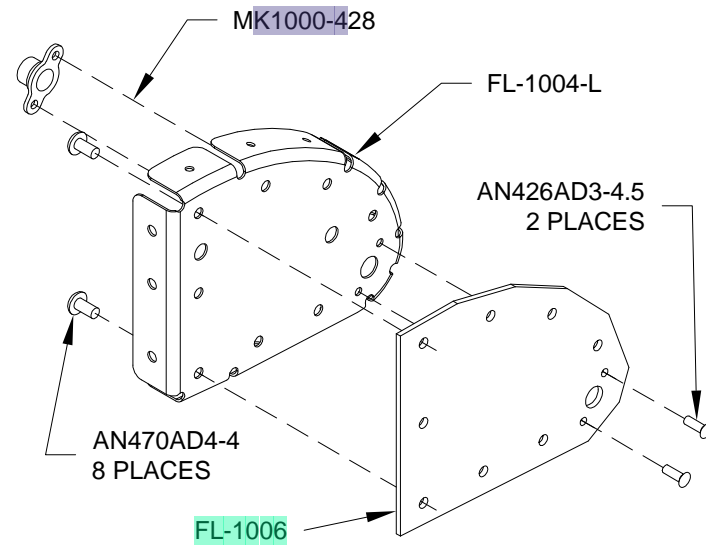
OUTBOARD ROD END RIB SUBASSEMBLY
